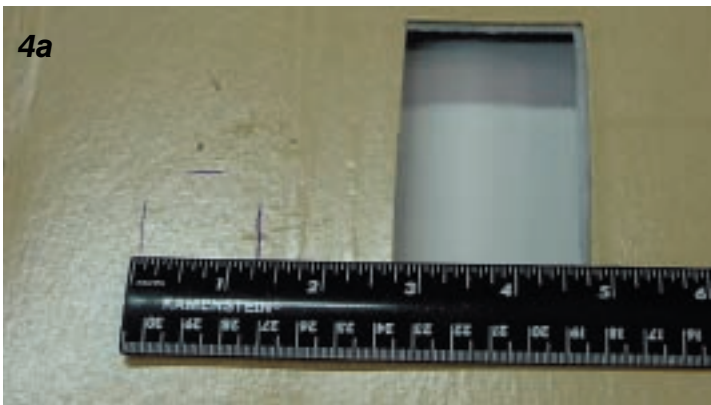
, #4b & #4c: The new pre-assembled standard door panels, part #707425, were then turned over to lay out the holes for the power door lock switches. We measured the locations off the inside door handle hole on our old panel and transferred them to the new ones.
